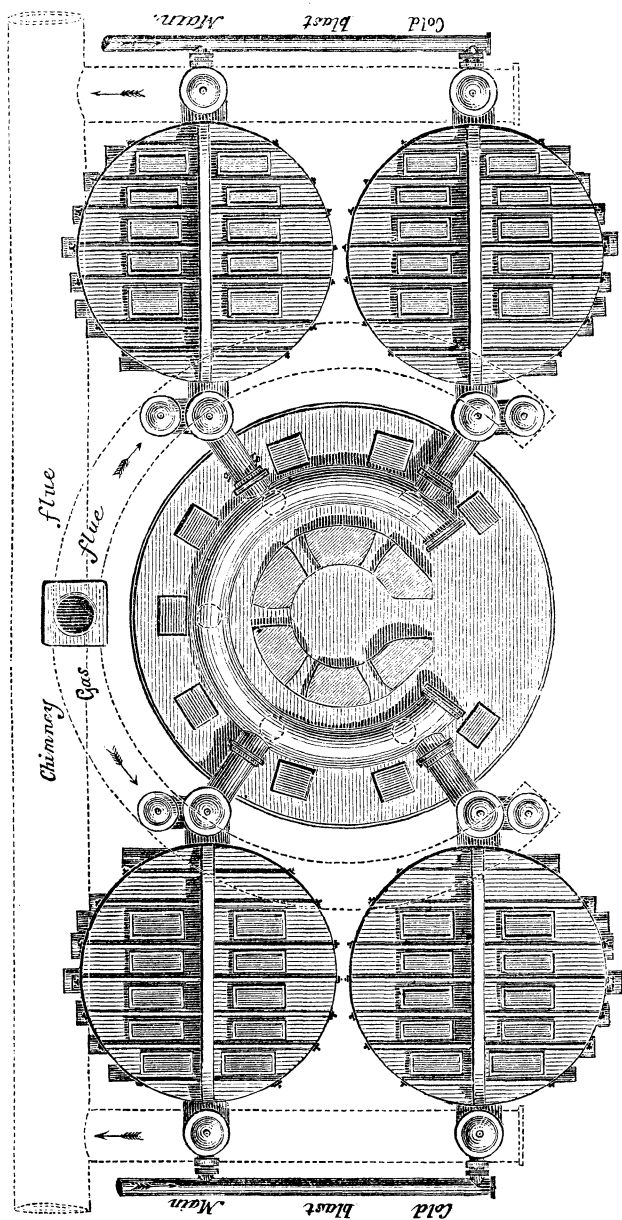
Plan of arrangement of Whitwell's stoves—Consett Works.
